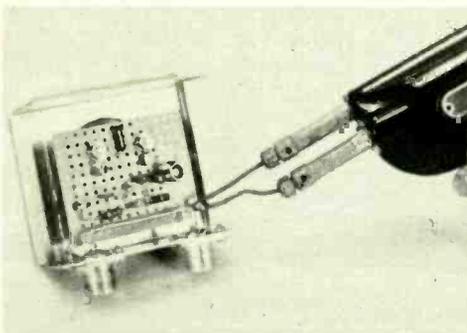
Last step in wattmeter construction is soldering R1's free lead to connecting wire. You may solder lead to any point along this wire.
